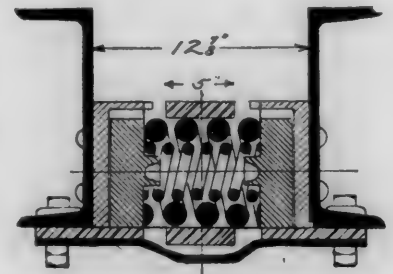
DETAILS OF WEDGE PLATES, WEDGES AND FOLLOWER PLATE.
